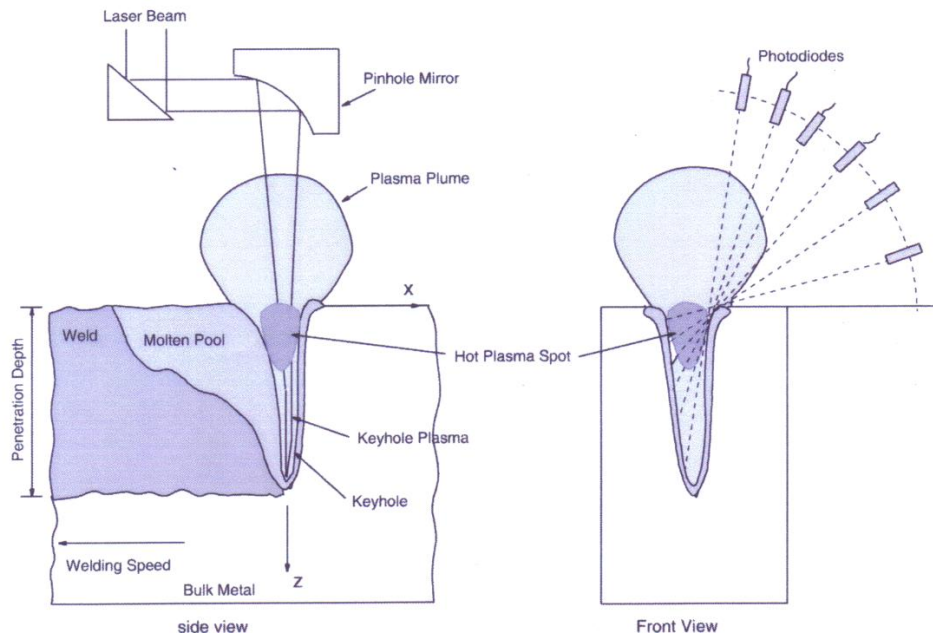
SETUP FOR MONITORING KEYHOLE PLASMA DURING DEEP PENETRATION LASER KEYHOLE WELDING [8]
